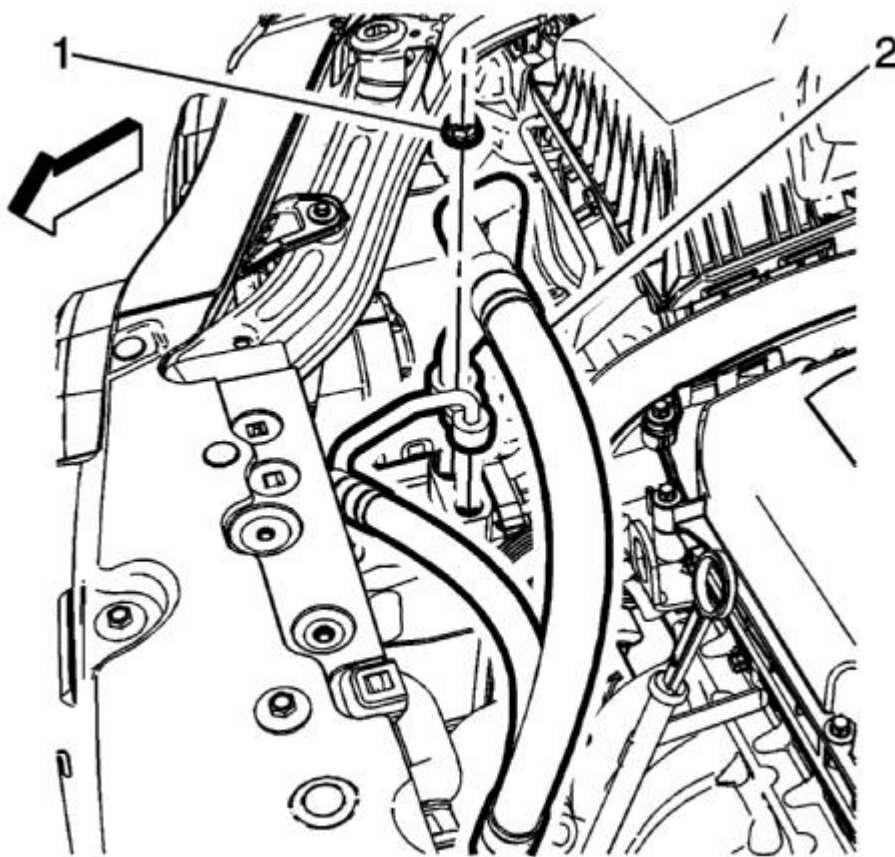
Air Conditioning Compressor, Condenser Hose & Nut
